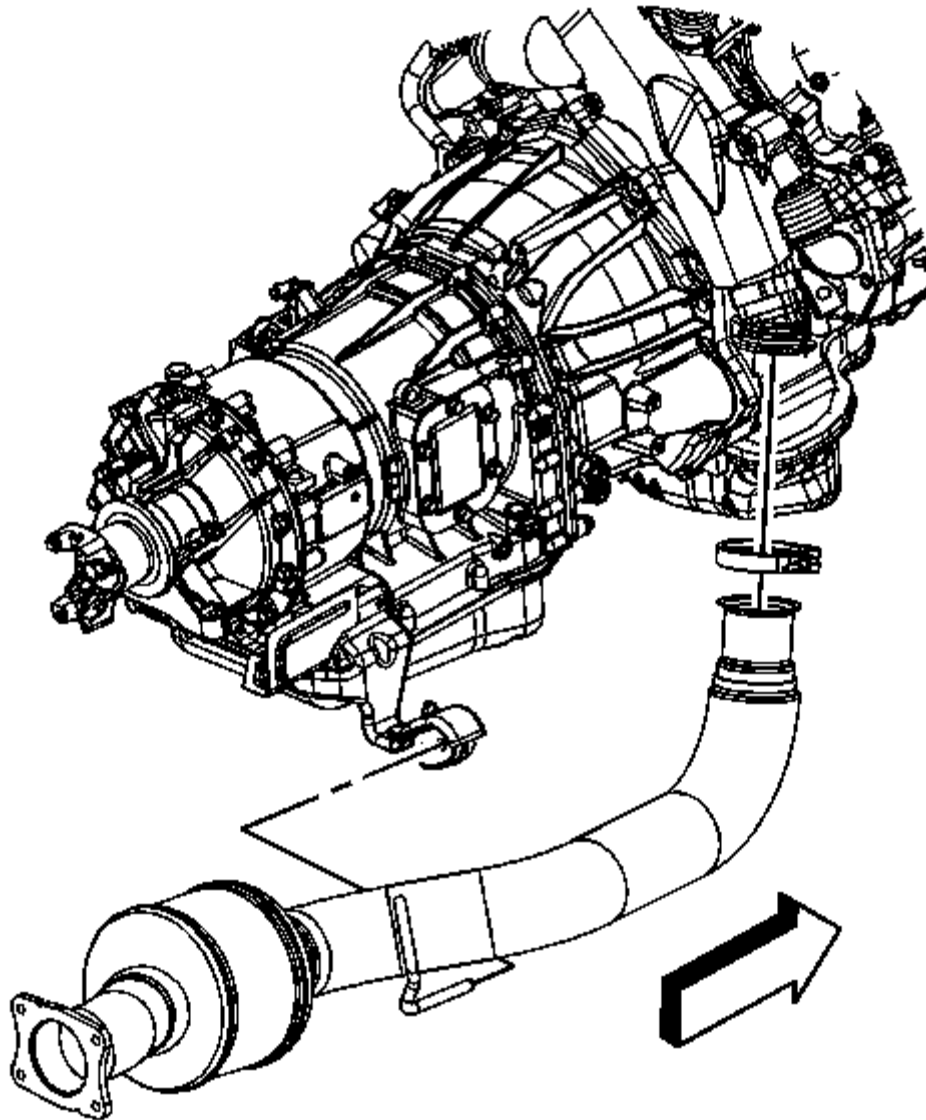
View Of Turbocharger Exhaust Pipe & Clamps
